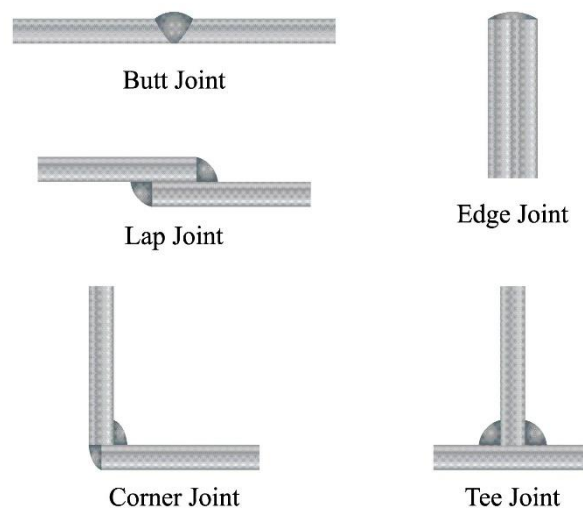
Representing the different types of joints for welding [TIG Brush].
